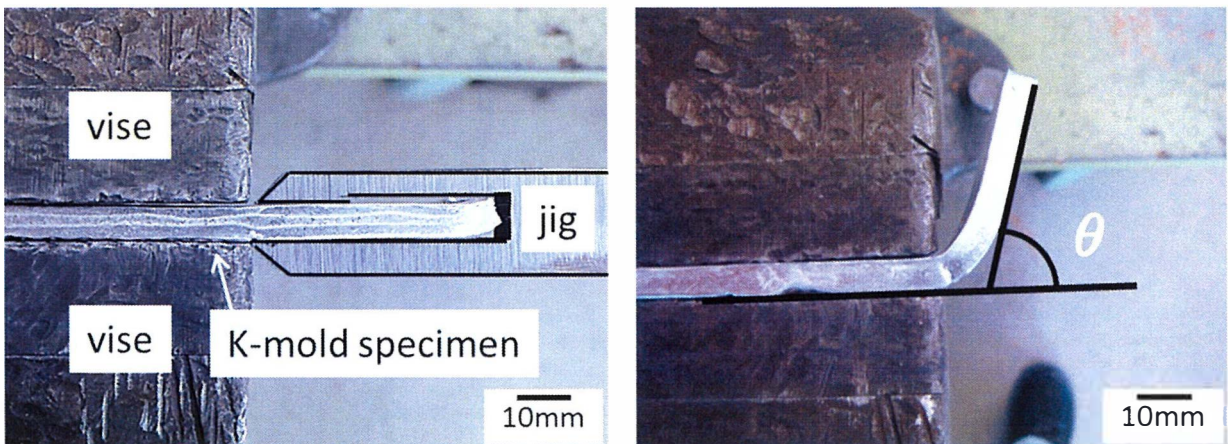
Schematic illustration of K-mold test and measurement method of bending angle (θ).
